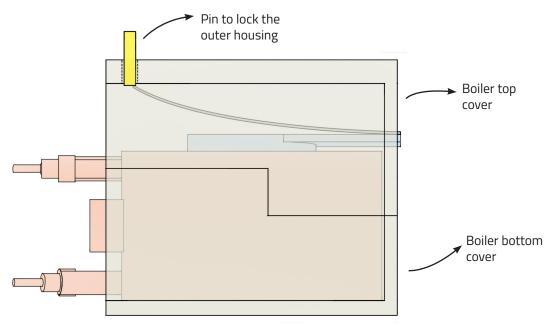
Bimetal pushing the pin through the boiler top cover, to insert into the inner housing. This locks the outer housing in-place as the pin is now fixed in-place on two points
